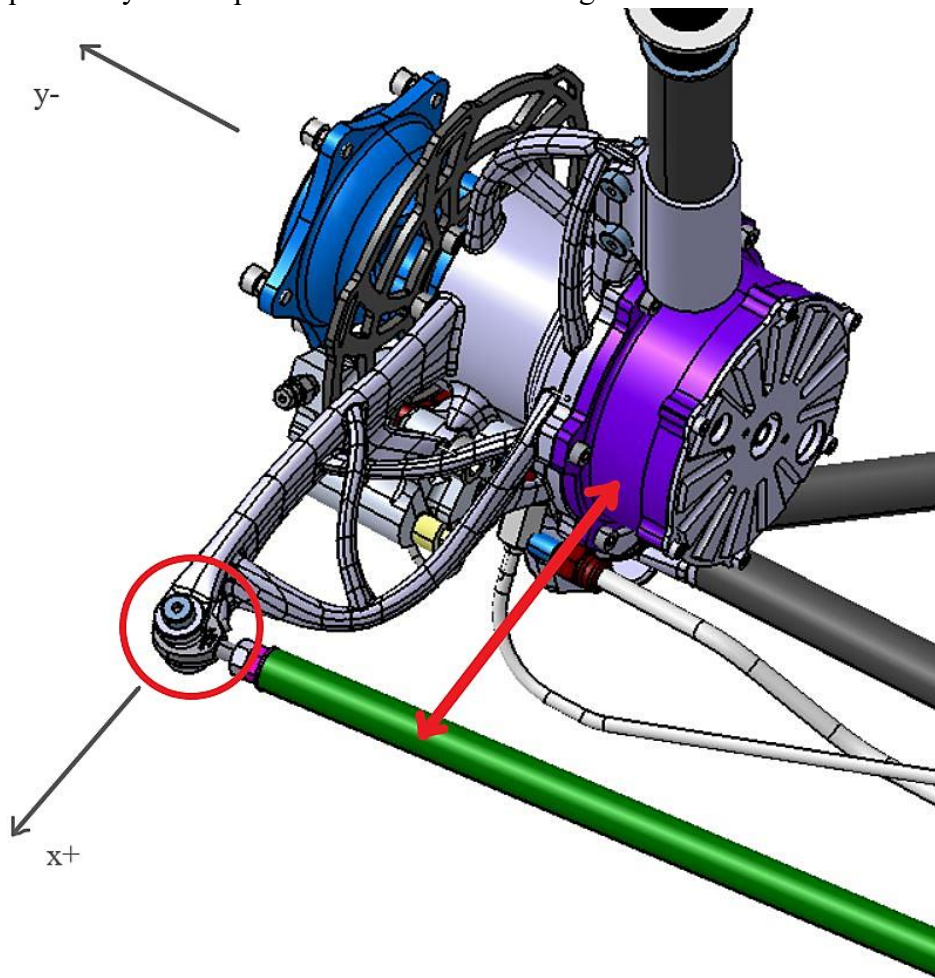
Connection point tie rod-knuckle and motor hub (Detail CAD drawing of the front mechanics of muc022, TUfast)
